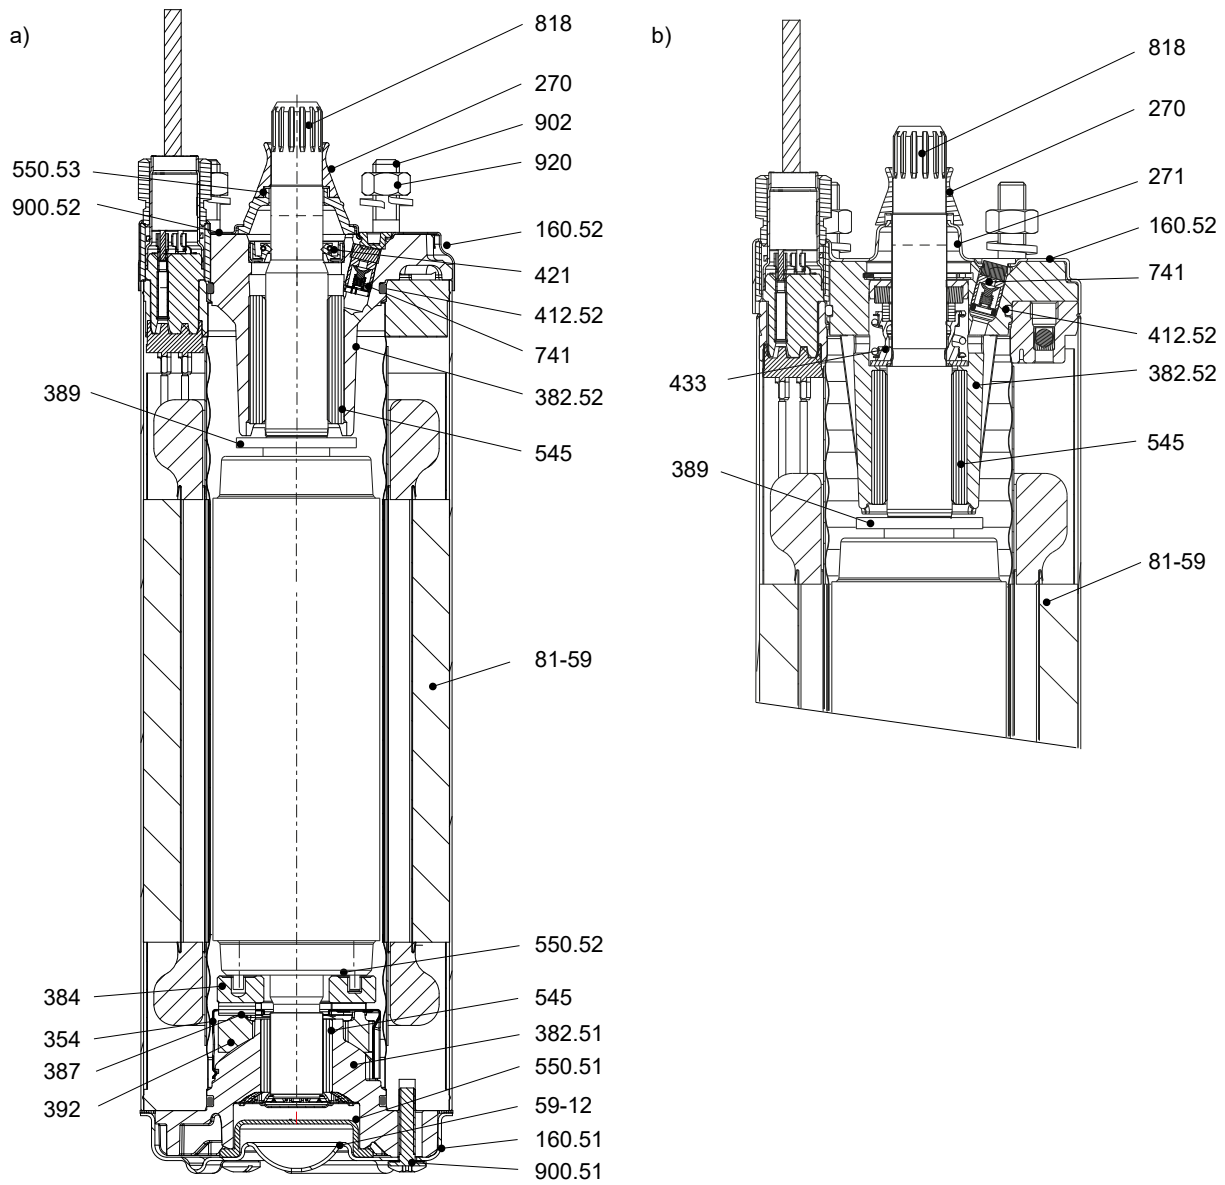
General assembly drawing of motor DN 100, up to 3 kW, a) Material variant E, b) Material variant C
